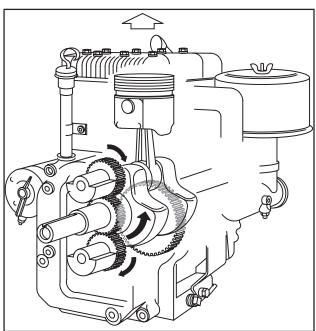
ALUMINUM ENGINES, ROTATING COUNTERBALANCE SYSTEM
